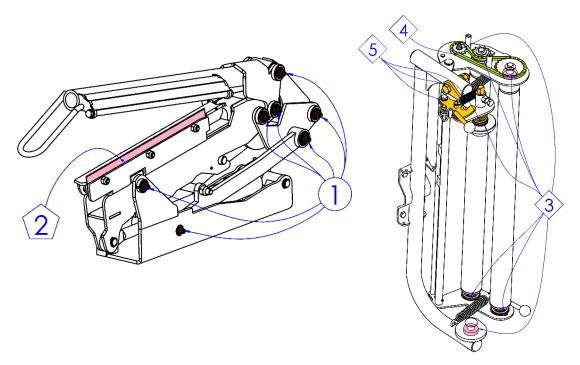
Lubricating points of foil cutter and foil feeder: 1 – swivel nipples; 2 – cutting blade; 3 – feeder bearings; 4 – feeder transmission drive chain; 5 – foil roll upper clamp
